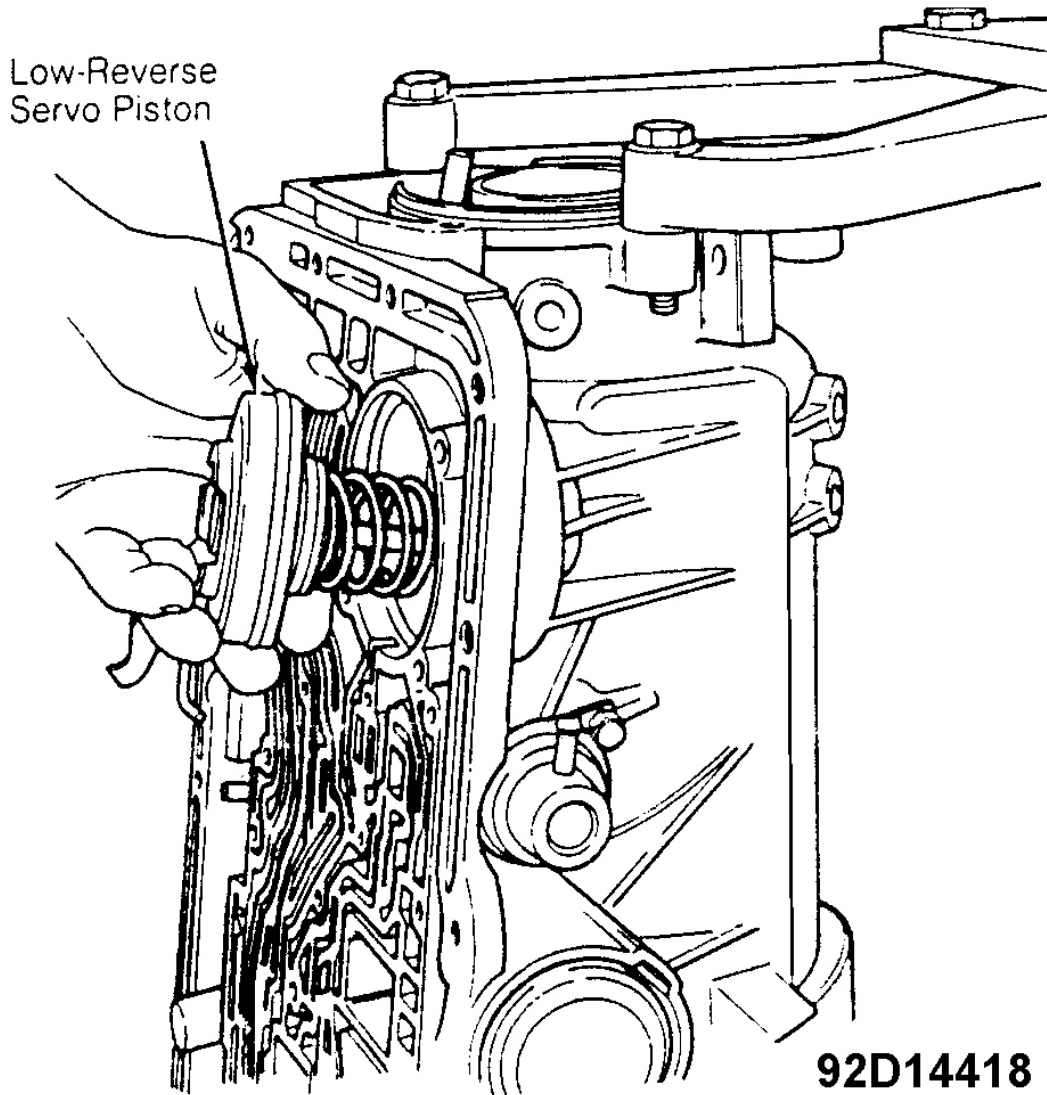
Removing & Installing Low-Reverse Servo Assembly
